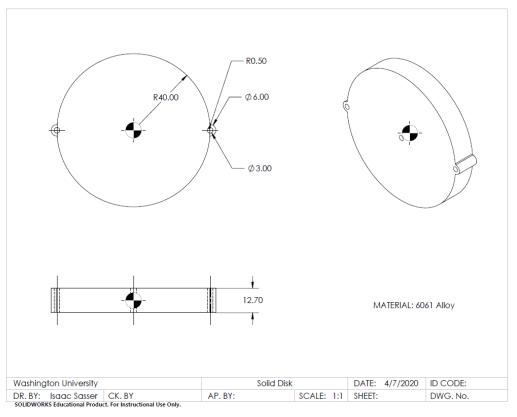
SOLIDWORKS drawing for the solid disk specimen.
